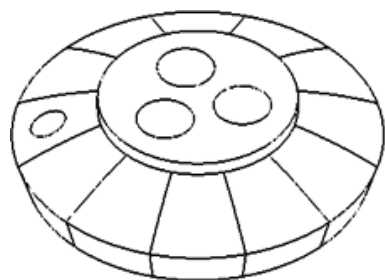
CAD model of precast block furnace cover (casting twelve).
